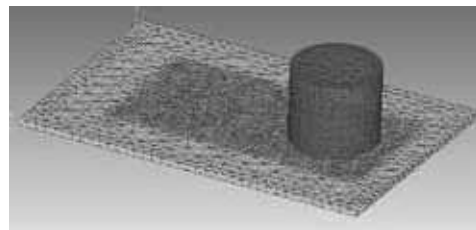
Sketch of the model for FSW process of thin AZ31 Mg sheets, with the pinless tool configuration.
